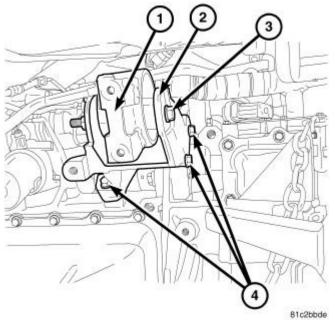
Identifying Front Engine Mount Courtesy of CHRYSLER LLC
